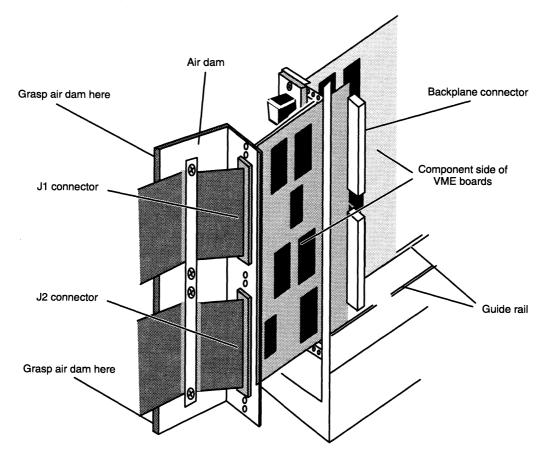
Inserting a Model 7411–K VAC/16 Board
